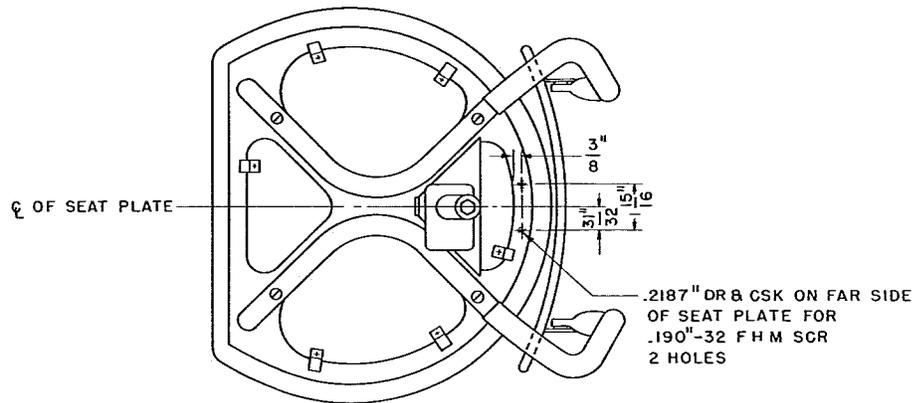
Bottom View of Upper Unit — KS-15531-type Operator Chairs
